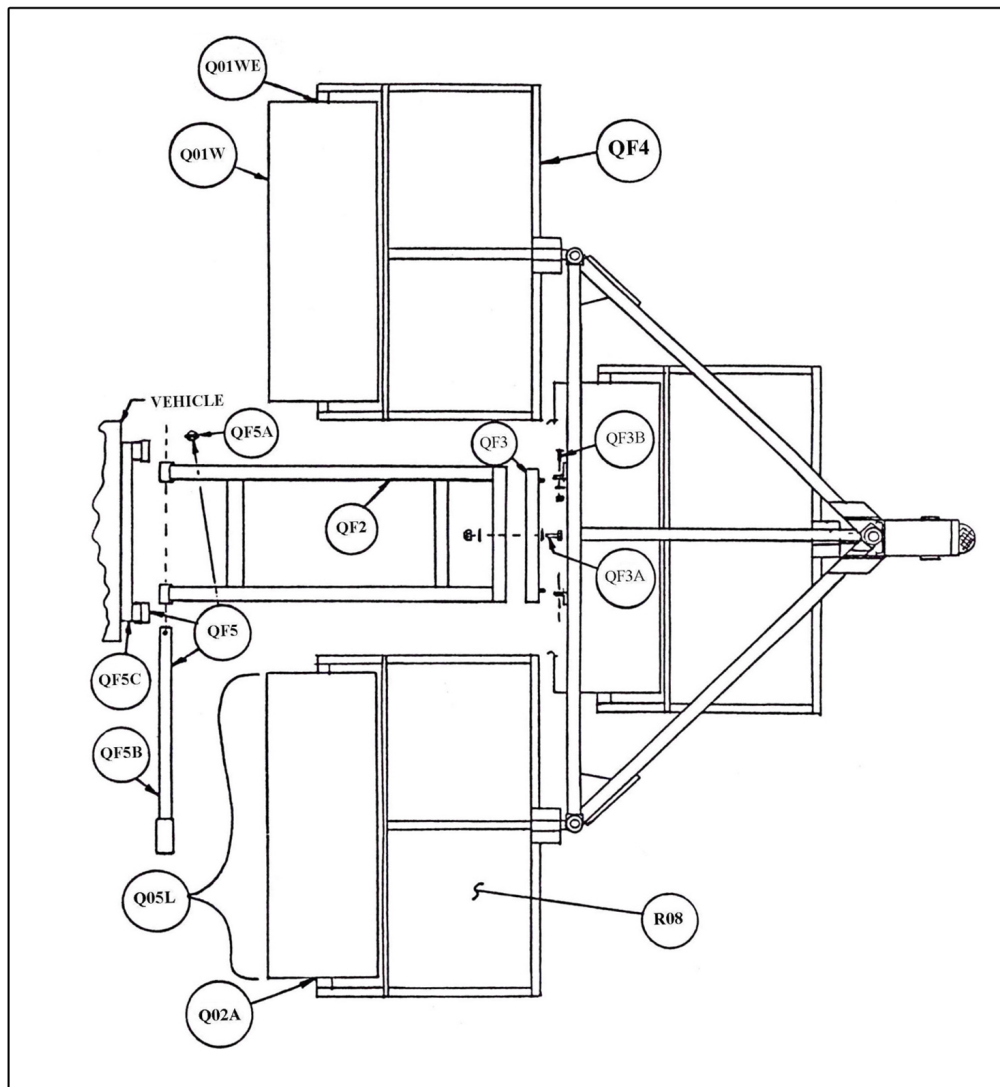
Swivel channel attachment and H-frame attachment, Top View
